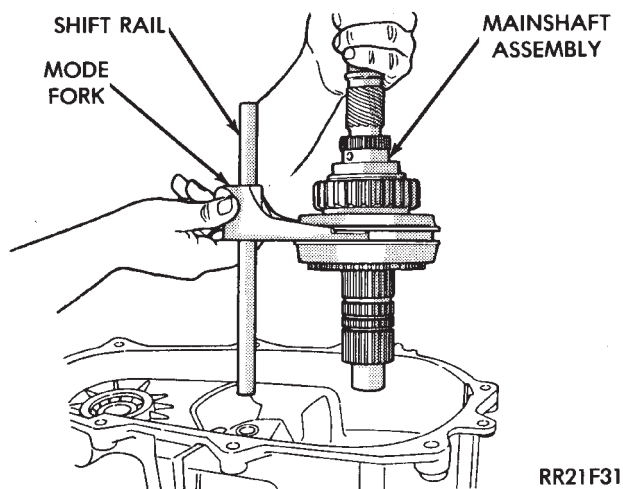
Installing Mainshaft And Mode Fork Assembly
